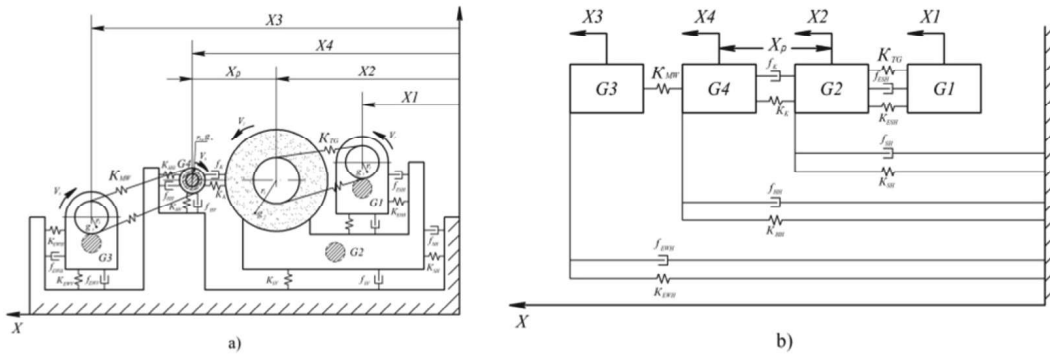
Mechanical model (a) and dynamic diagram (b) of the machine-part system during centerless grinding on the SWaAGL-50 machine.
